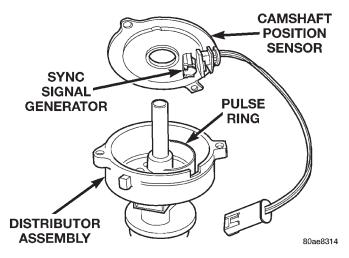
Camshaft Position Sensor—Typical CRANKSHAFT POSITION SENSOR—PCM INPUT
